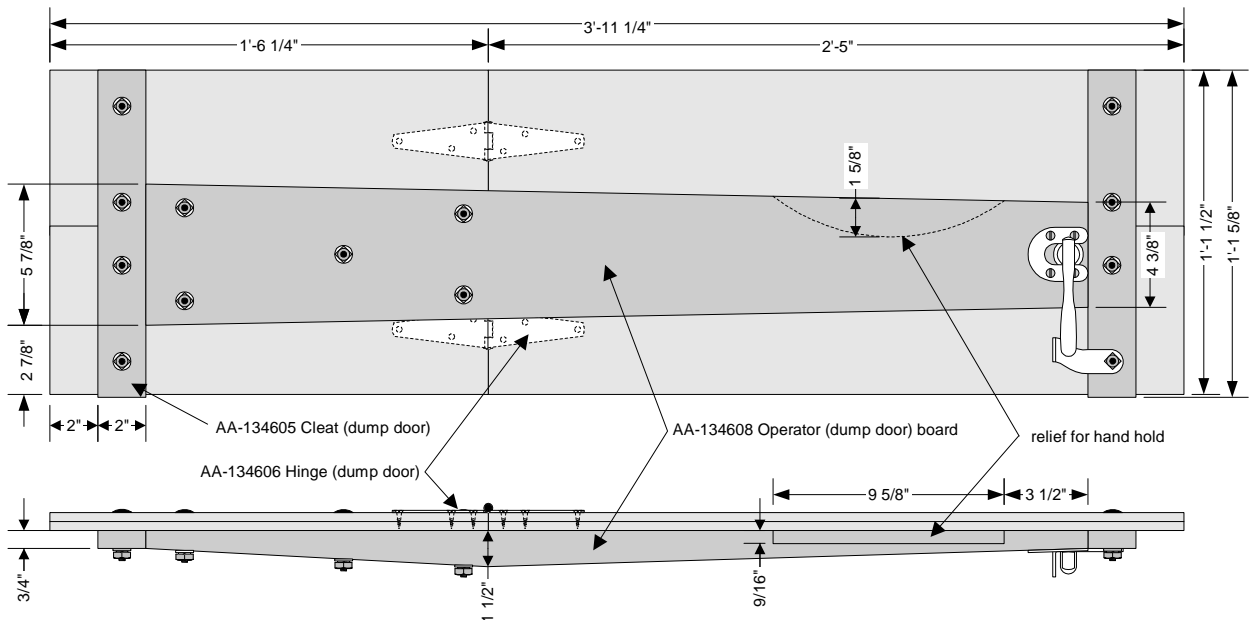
shows rear and top views of the dump door in the closed position. The wooden cleat at each end of the door was attached with carriage bolts. The operator board was attached to the left door side with carriage bolts. This operator board had a unique shape: each end was a different height; the board was 3/4" thick at each end but was 1-1/2" thick where the right and left door sides joined; there was a relief for a hand hold so that the board could be pulled outwards when opening the door. The two hinges were attached to the inside of the door as shown. Illustration #20 shows AA-134606 hinge details. The clasp, striker plate, and lock plate are shown at the right end of the operator board. Details of these parts are found
